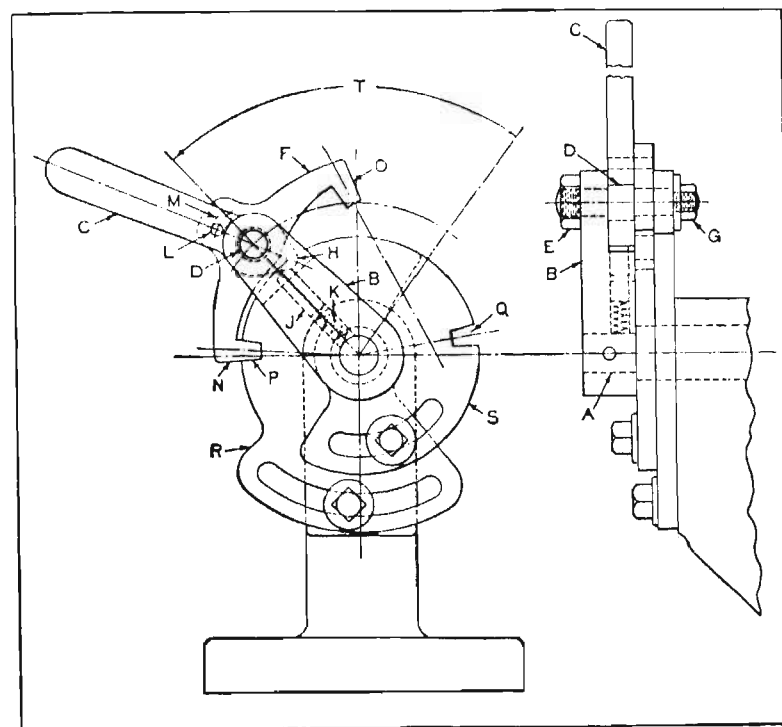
Two-position Indexing Mechanism for Milling Machine.
